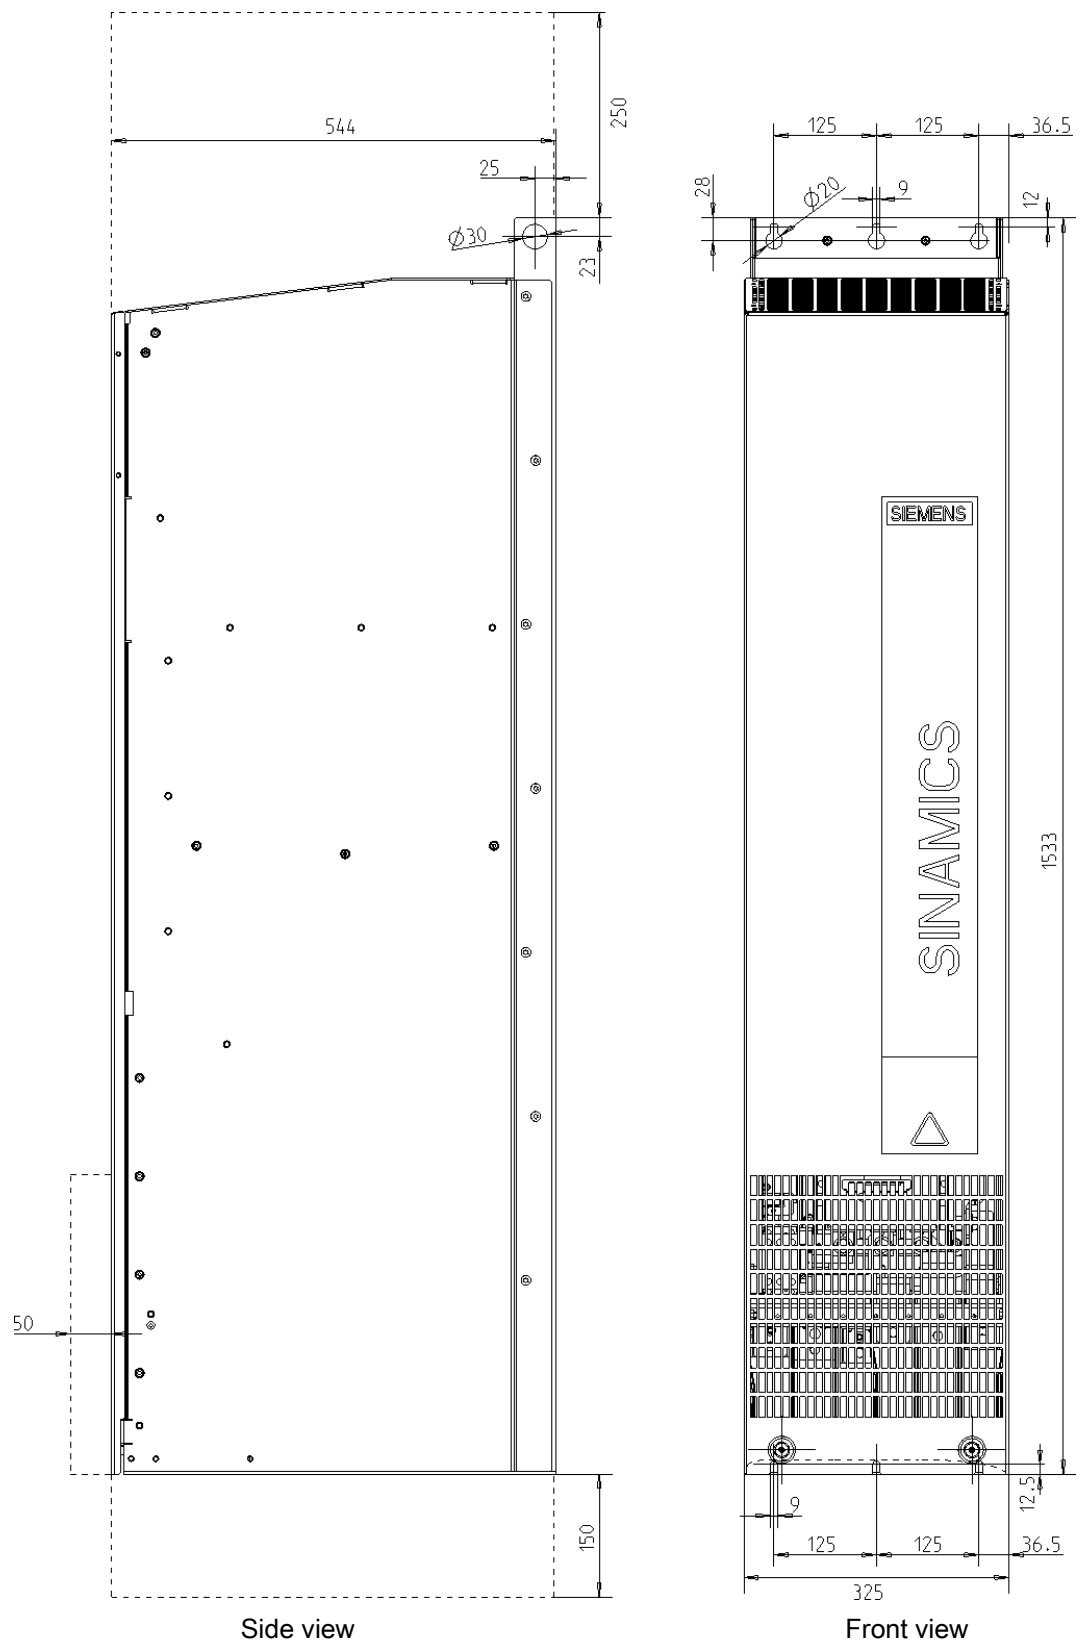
Dimension drawing of the Active Interface Module (type GI)
